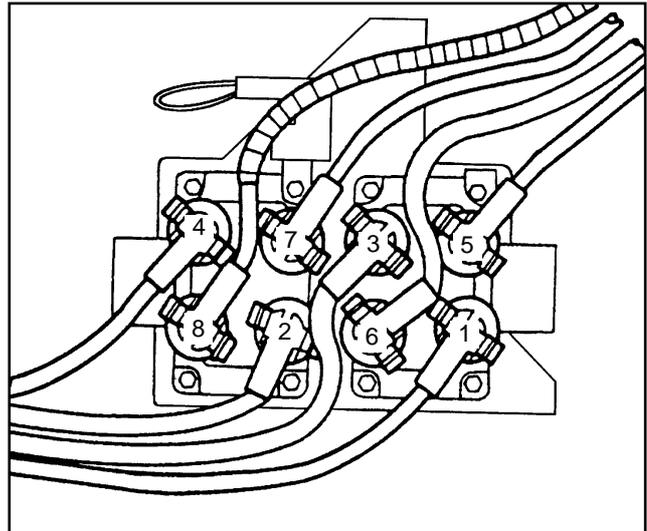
Ignition Coil Packs - Eight Cylinder
